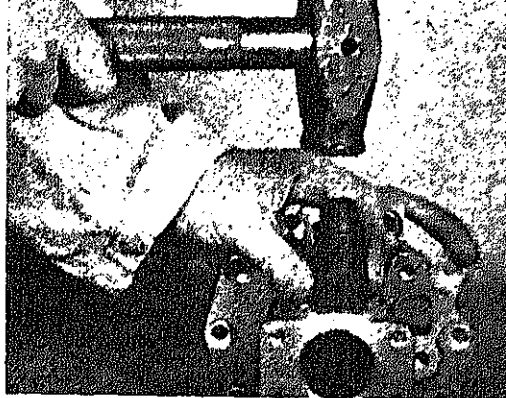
Fitting the bushing of the turning fork by means of tool 9201 0351.
